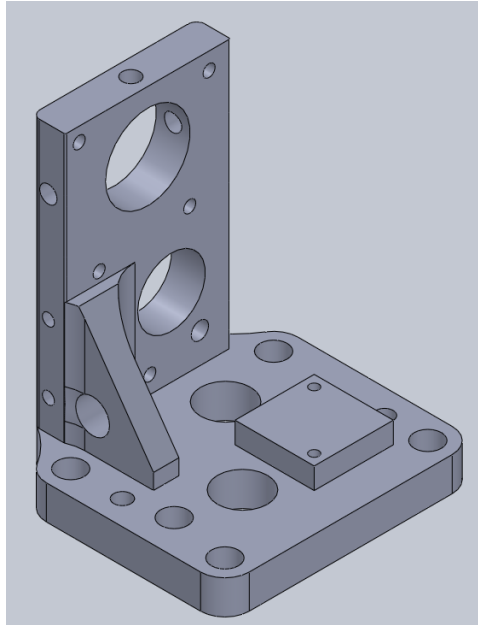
Instrumentation mounting bracket designed by Diversified Technical Systems (Seal Beach, CA)
